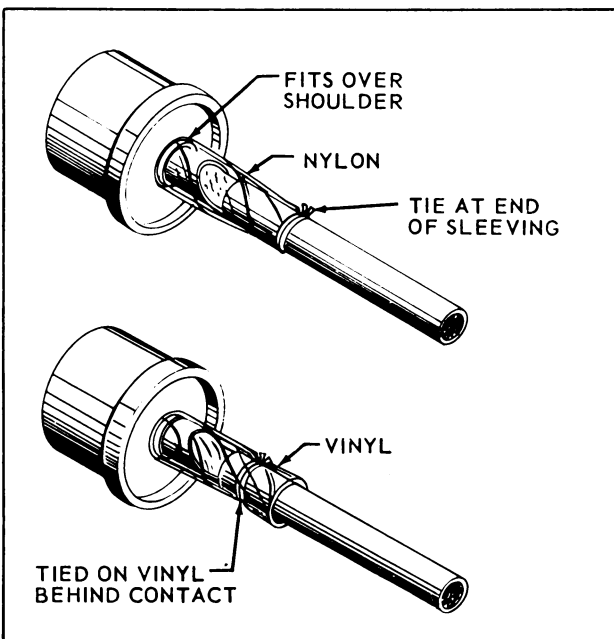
Insulating Sleeving Installed Over Solder Cup
